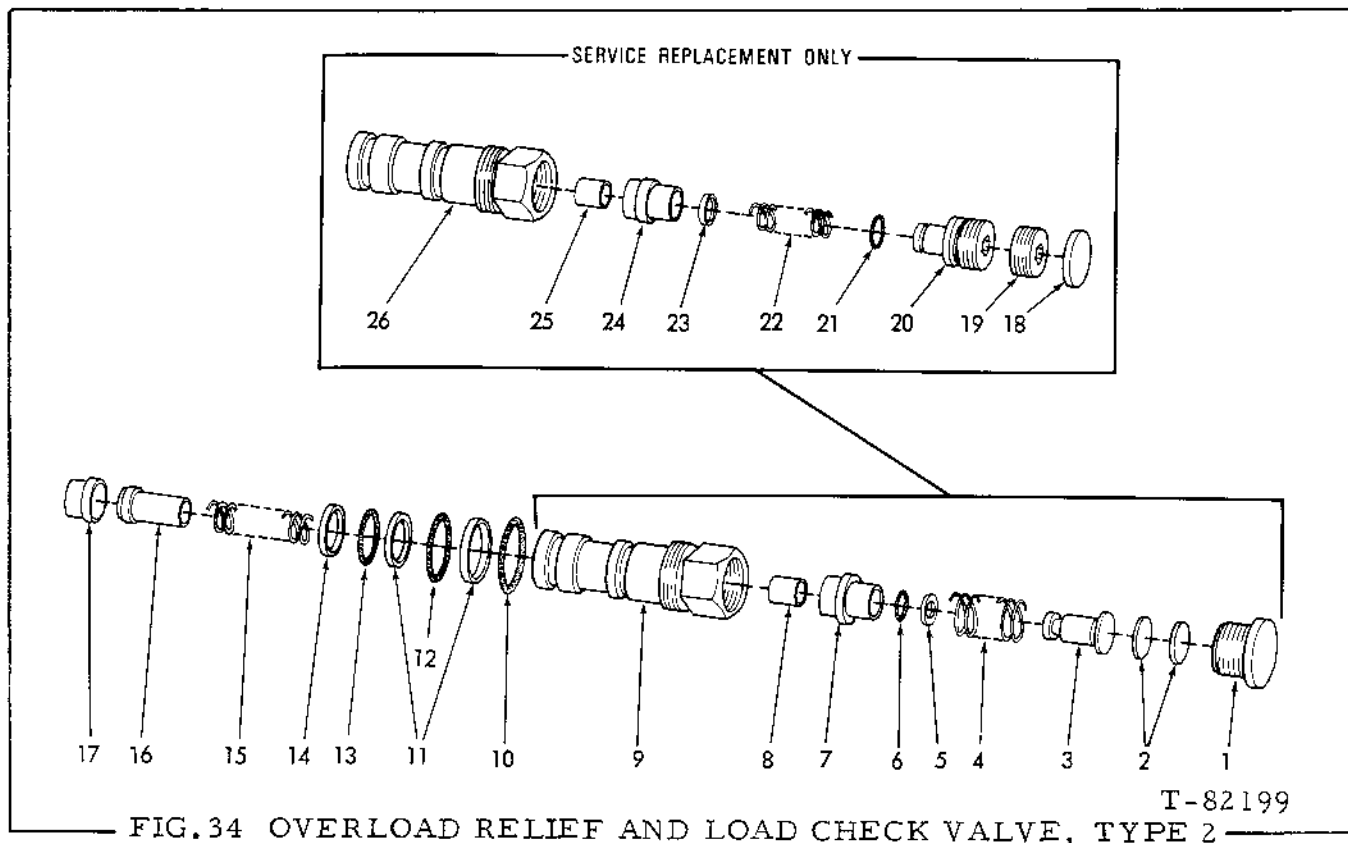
OVERLOAD RELIEF AND LOAD CHECK VALVE, TYPE 2
